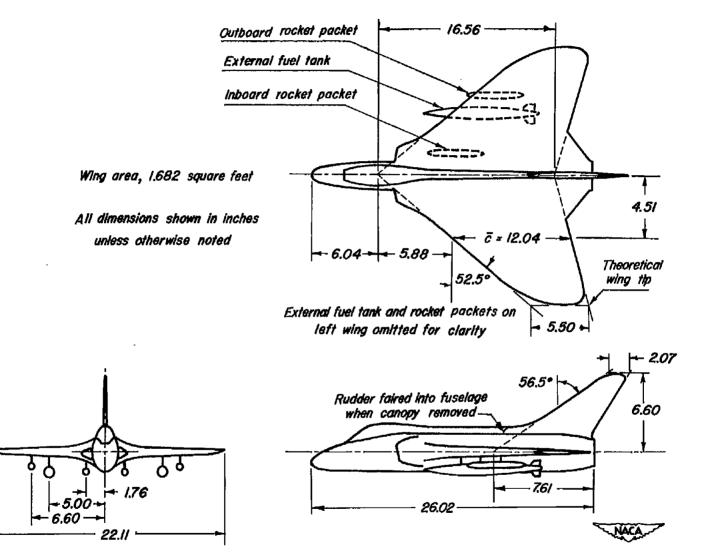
Three-view drawing of the model showing the external fuel tanks and rocket packets.
